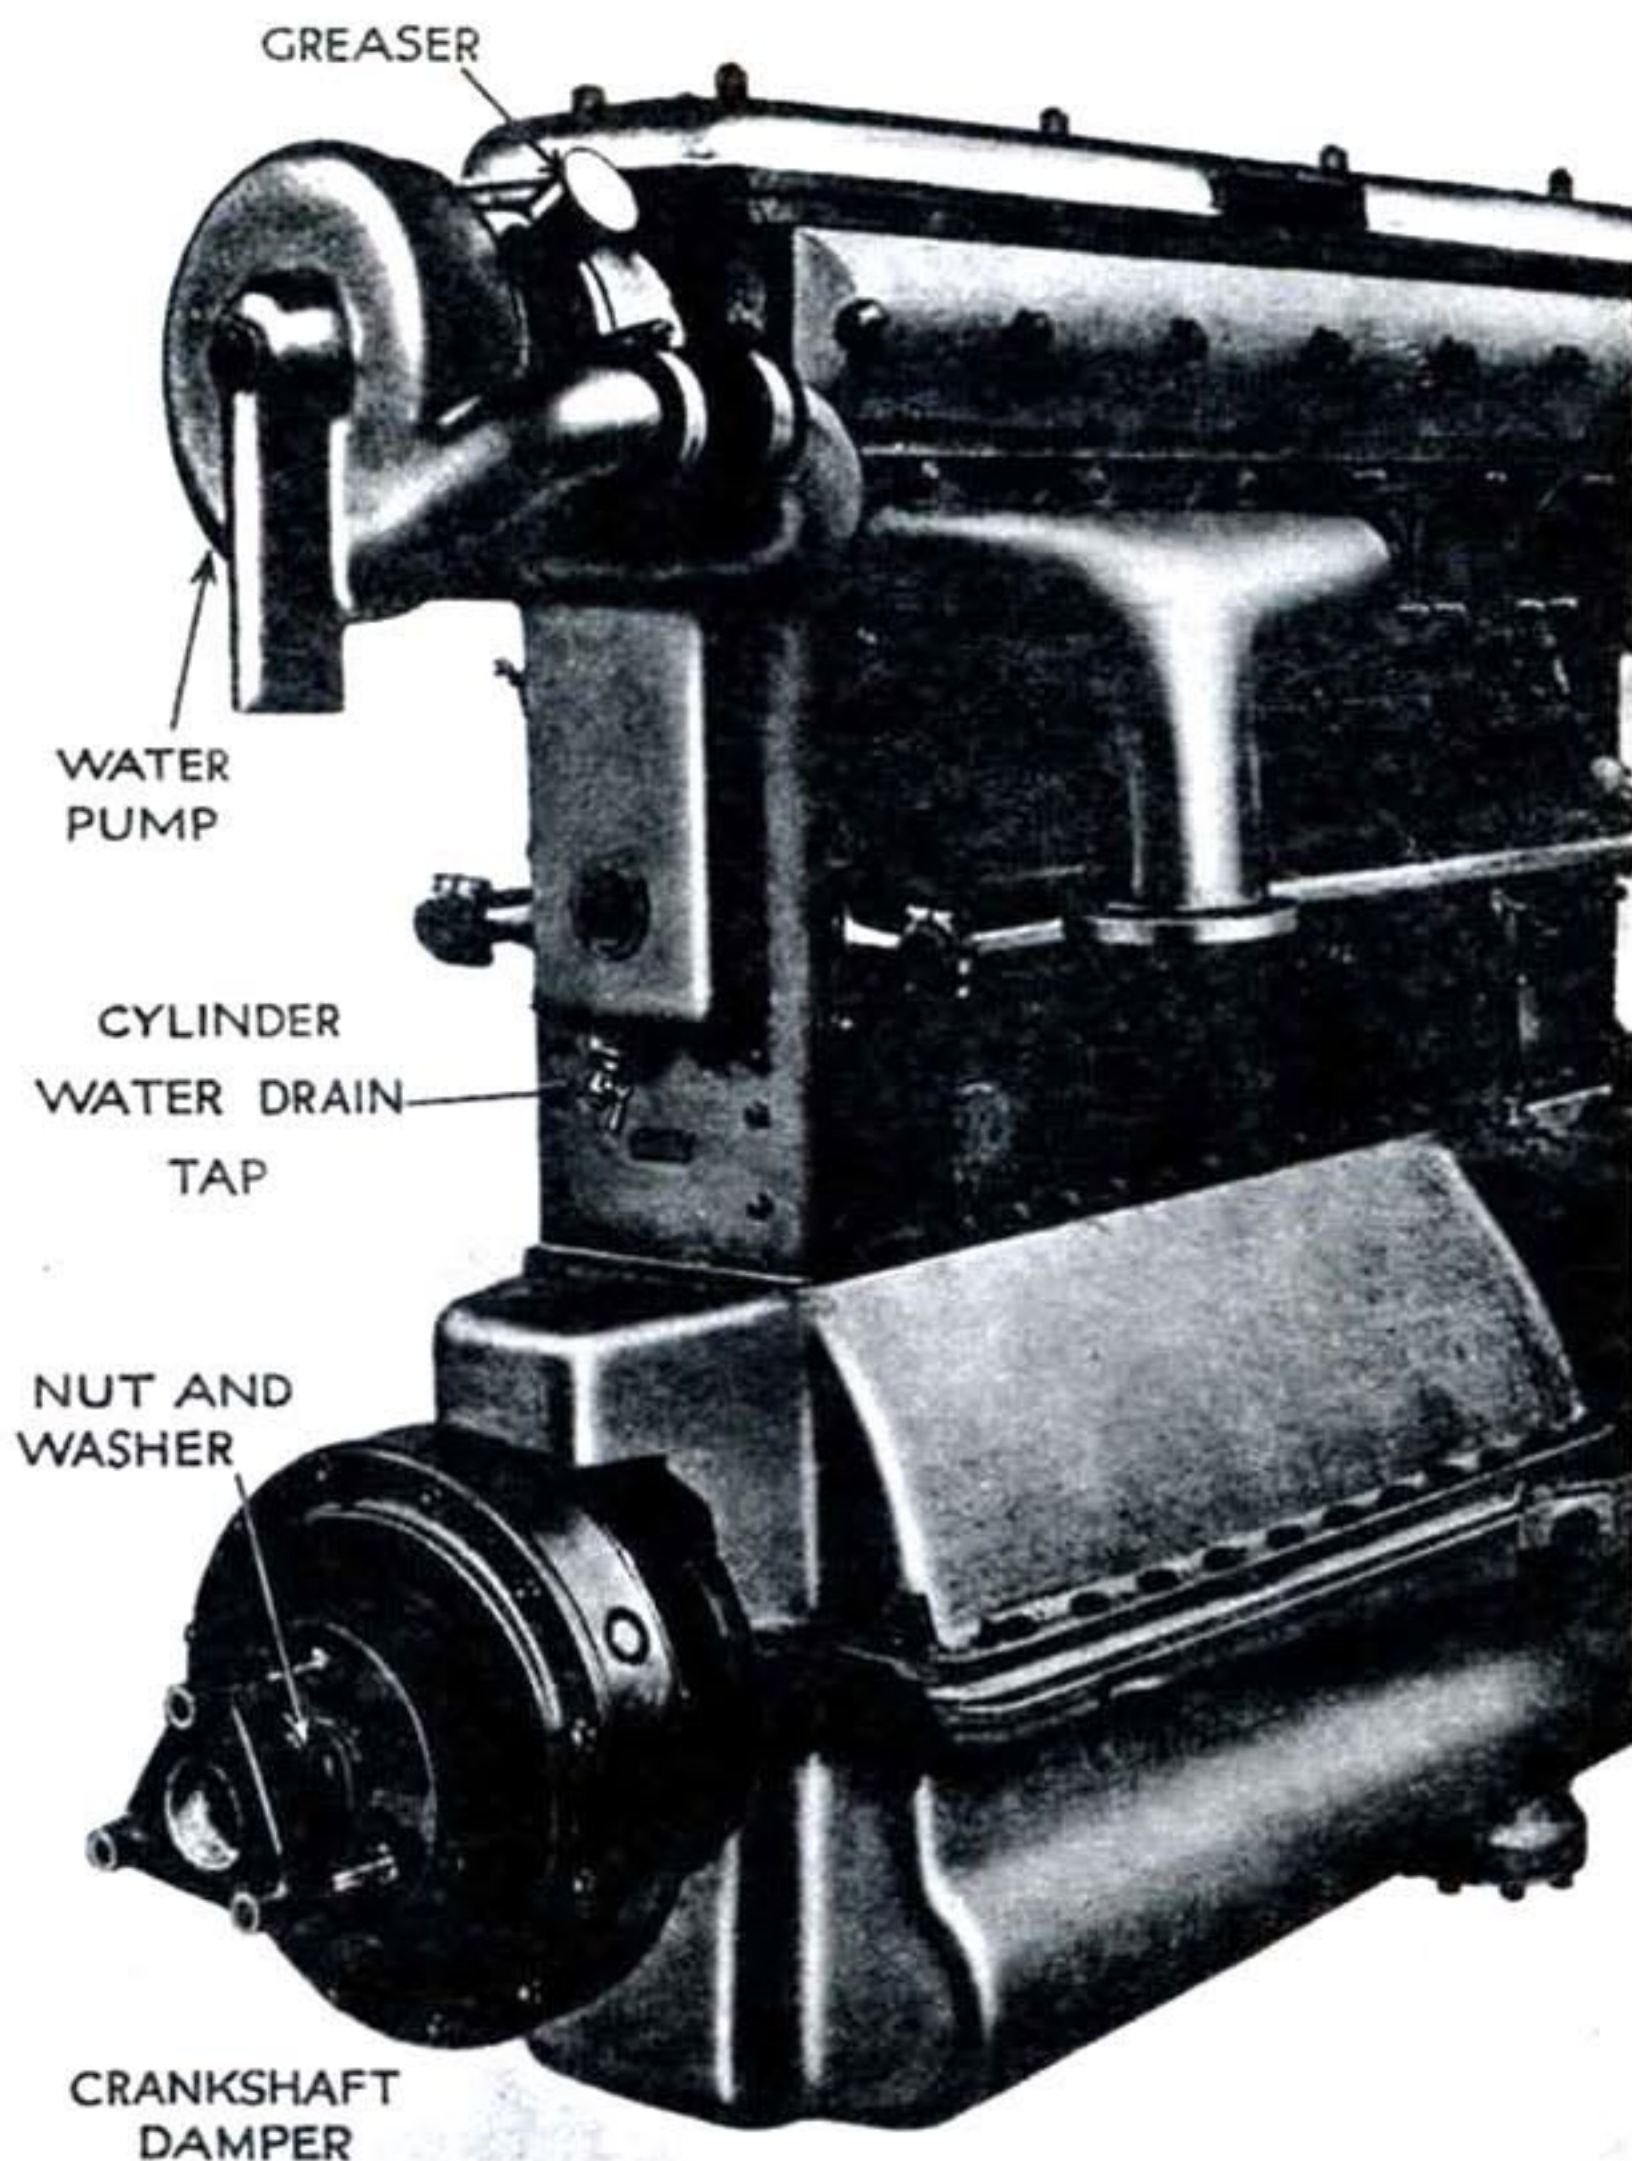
CRANKSHAFT DAMPER AND DYNAMO COUPLING.
